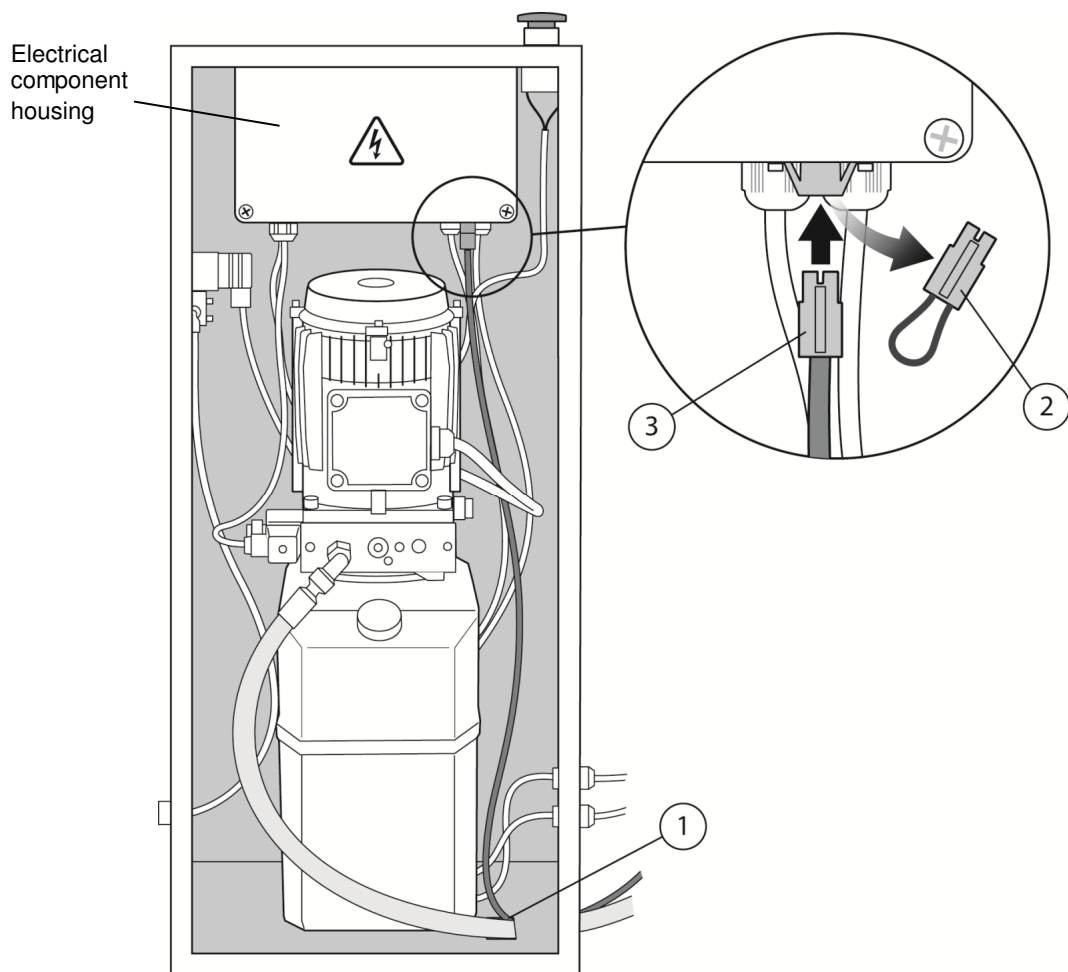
Connection of the cable from the draw aligner position limit switch.
